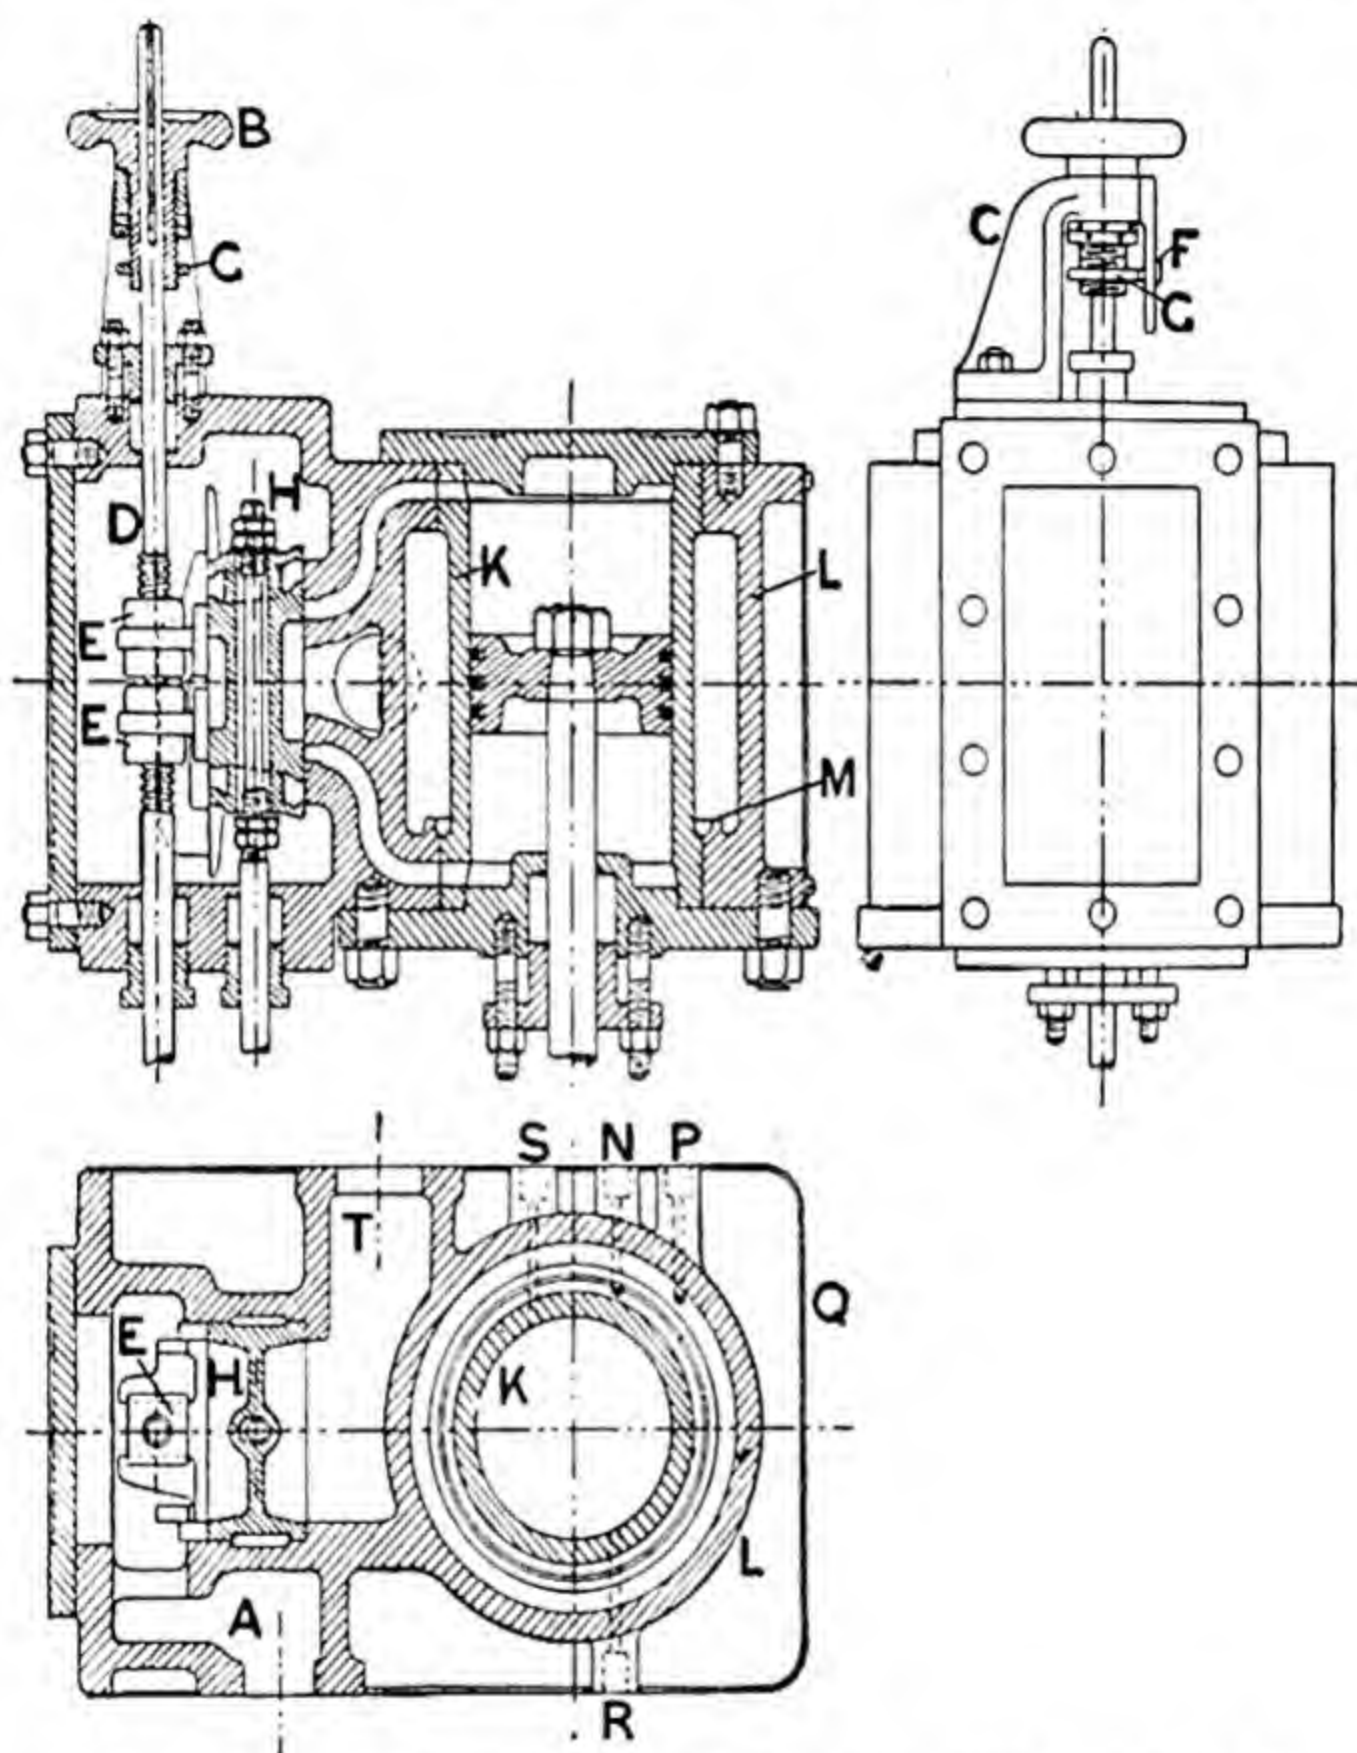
Details of the 6" cylinder for the experimental steam engine.
